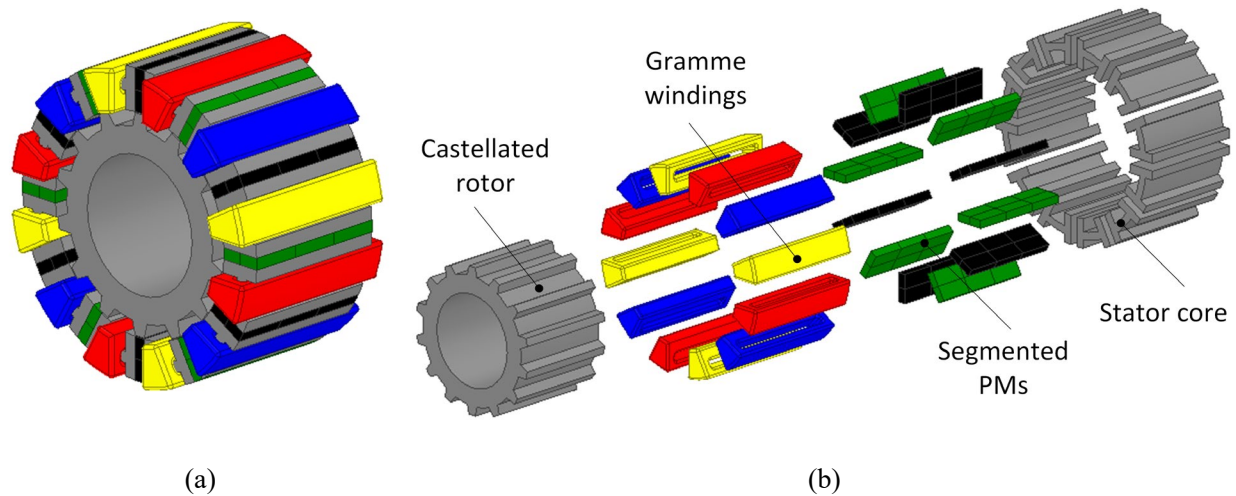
One implementation of the QMag technology, (a) assembled view, (b) exploded view.
